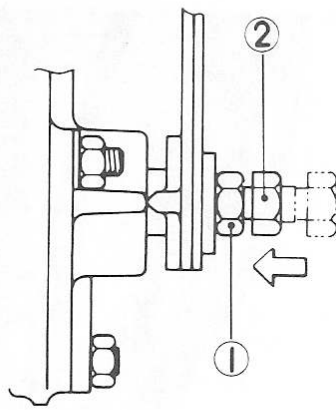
On some models with mechanical disc brakes, the pad wear is indicated by the position of the caliper bolt (2) in relationship to the locknut (1) (Sec 22)
